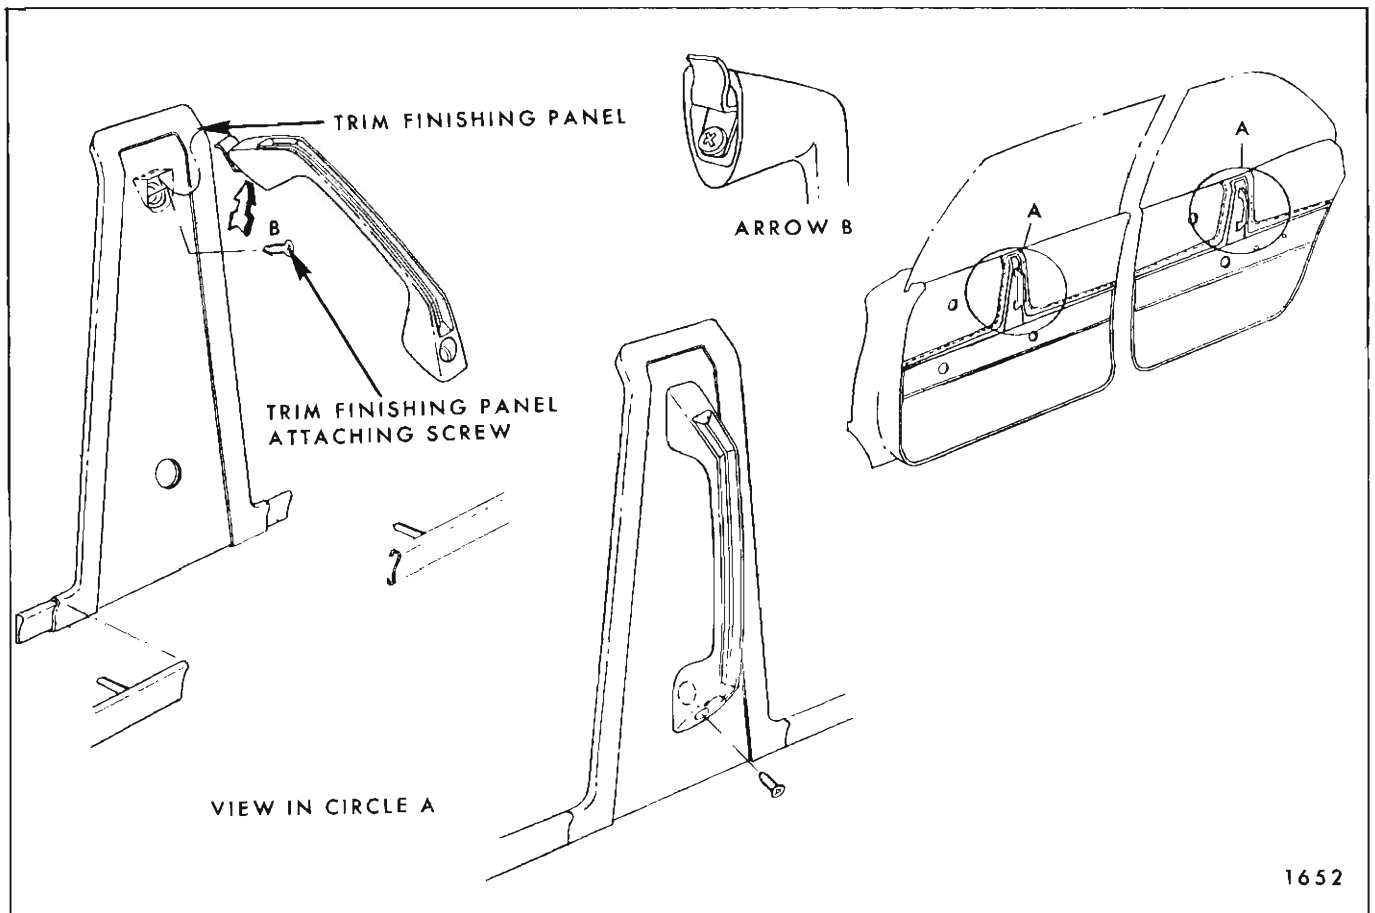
D6—Door Pull Handle Installation - 48000 Series
